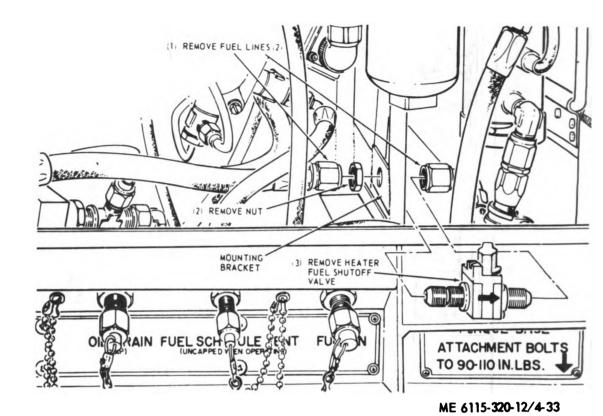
Heater fuel shutoff valve, removal and installation.
